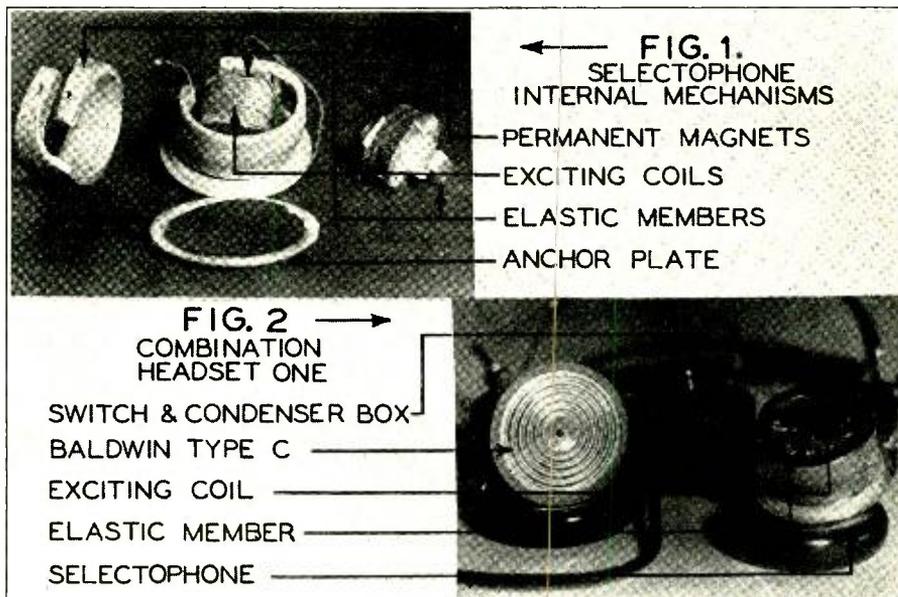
specifically indicates the internal parts of two selectophones. The upper center unit is completely assembled, i.e., the magnet is attached to one end of the elastic member about which the exciting coil is fixed, while the other end of the elastic member is fixed to the anchor plate. The anchor plate is the sole means of support for the unit, and it is held firmly to the case by the screw cap of the receiver itself. Surrounding the assembled unit are seen the permanent magnet, anchor plate, and coil elastic member combination of an un-assembled unit.
